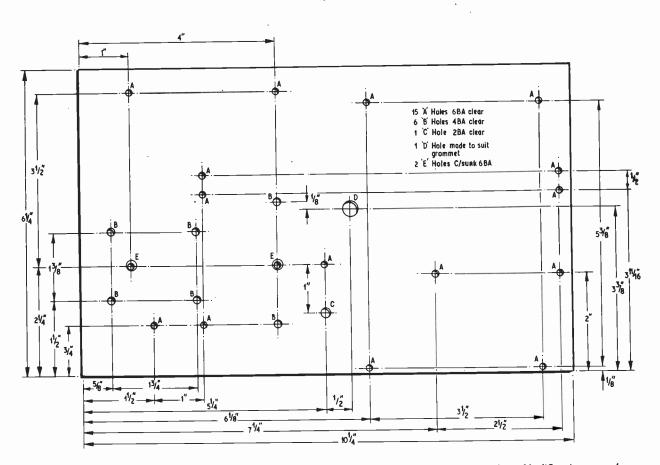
Chassis drilling details assuming components used are as specified in the components list. Modifications may be necessary for variations of component type. Clearance above chassis $2\frac{1}{4}$ in
